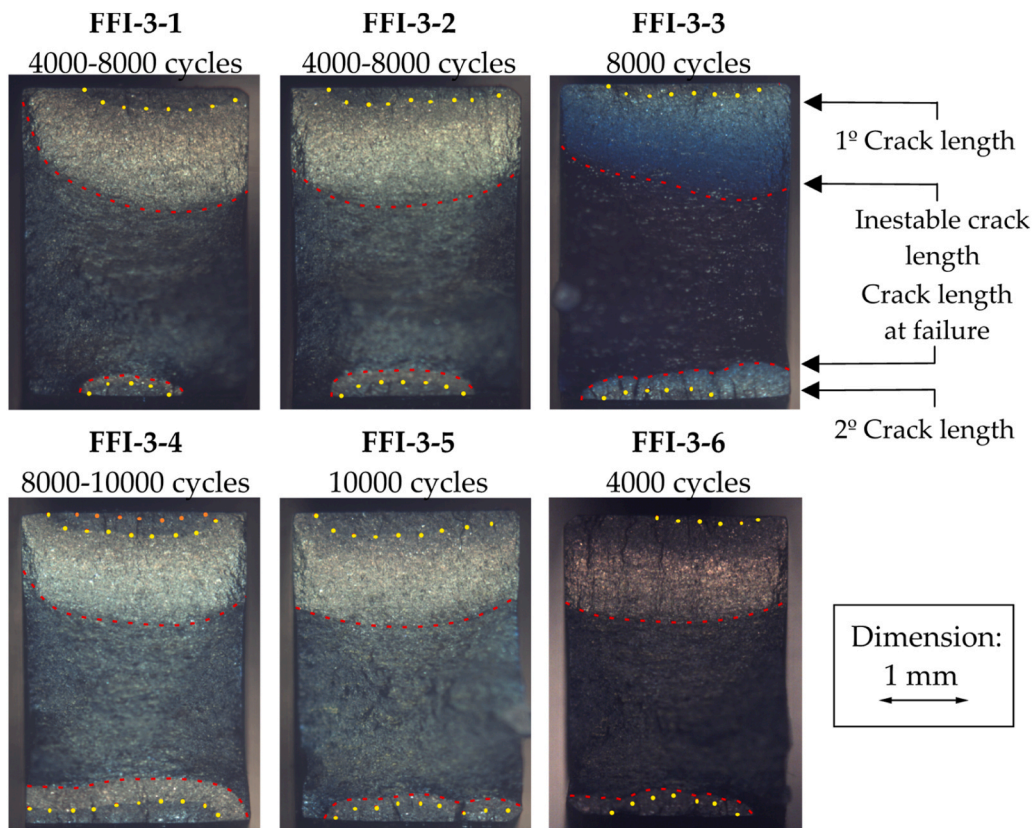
Fracture surface of marked fretting fatigue test at HT - type 3.
